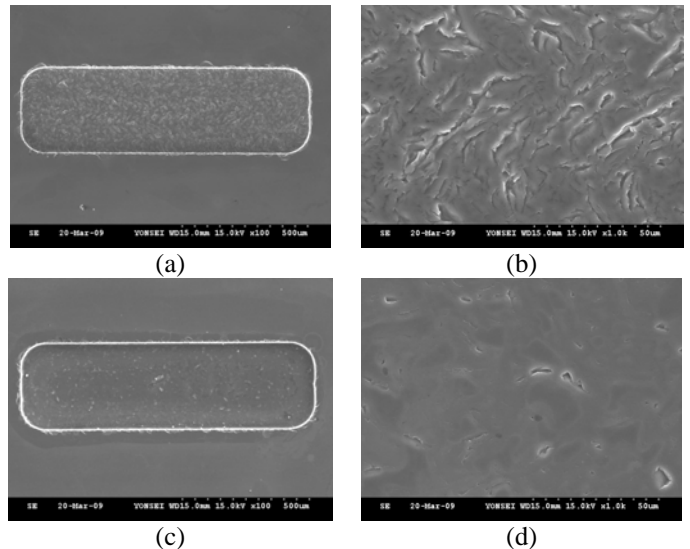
SEM images of machined surface of glassy carbon using : (a) rough end milling, magnification 100X; (b) rough end milled, magnification 1kX; (c) fine end milling, magnification 100X; (d) fine end milled, magnification 1kX
